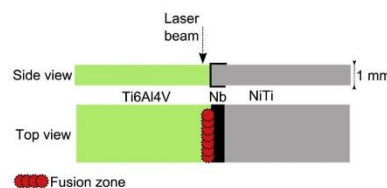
Schematic of the set up used in the welding procedure.
